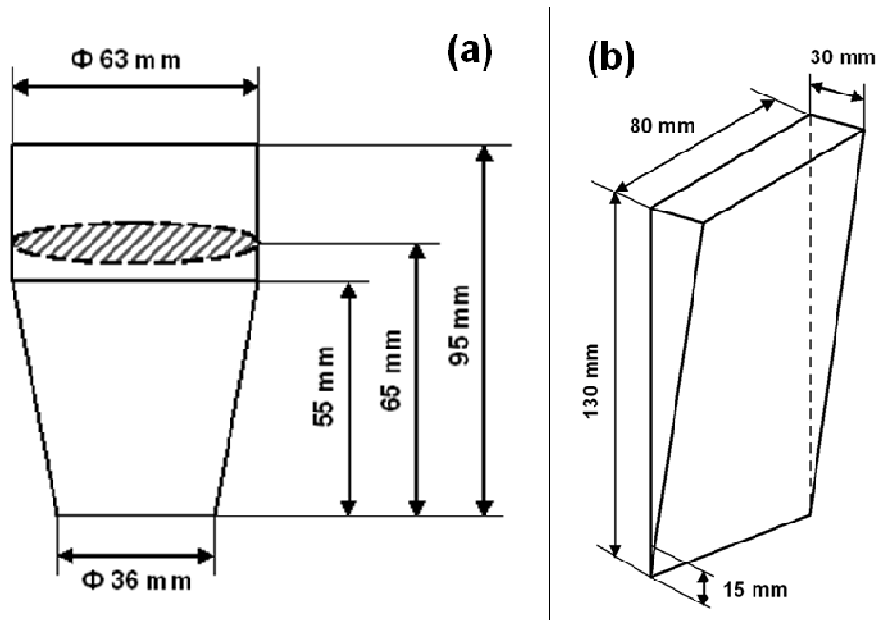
Schematic representation of the dimensions of (a) mild steel mould and (b) wedge-shaped copper mould samples and the cross section locations, where grain size was evaluated.
